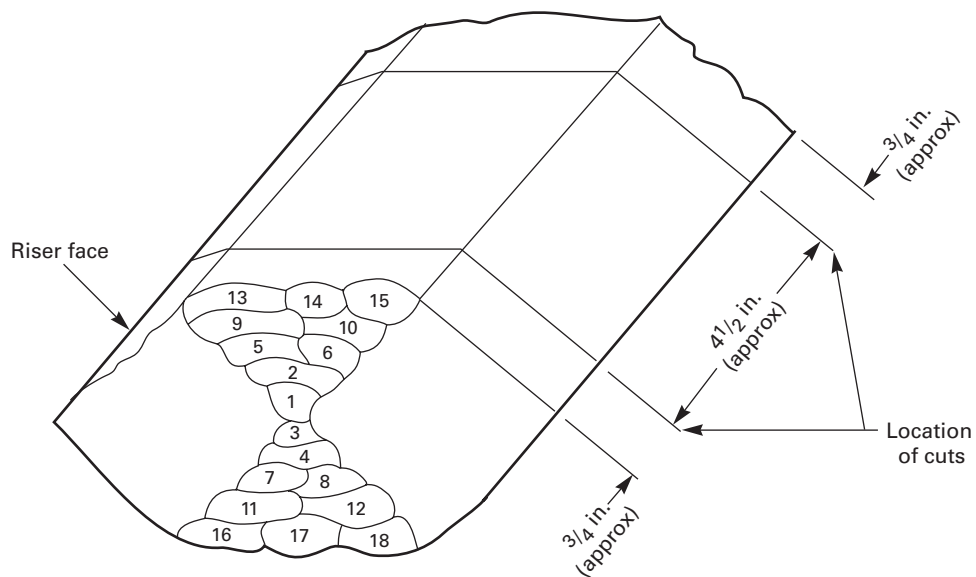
WELD TEST BAR (AS CAST)
